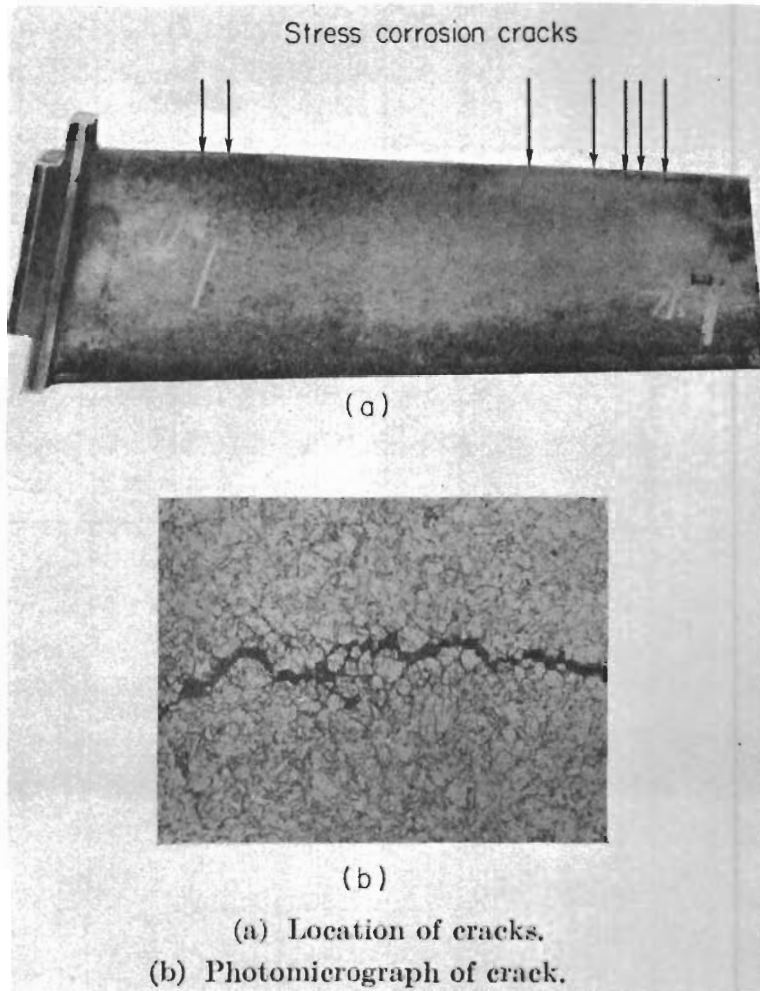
TYPICAL BLADE CRACKED BY STRESS CORROSION
